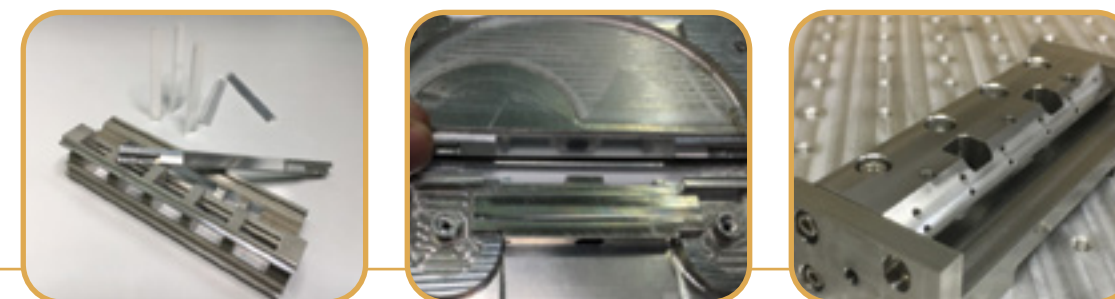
(Left): Plexiglass replicas of fused-silica fold-prisms, aluminium prism mount test-article and prototype alignment jig. (Middle): Plexiglass fold-prism in a test-mount, held where it will be located in the IFU cassette. (Right): Final alignment jig to position fold-prisms during bonding. These are all custom parts designed in the fibre lab and fabricated in the SAAO shop.
